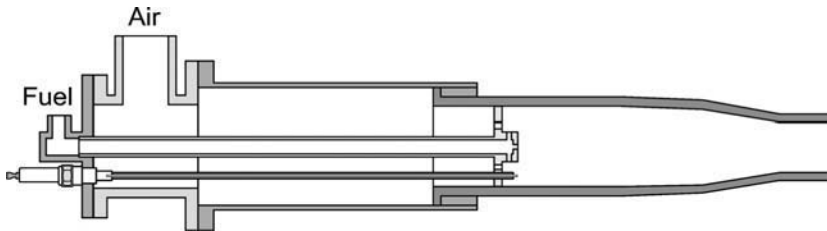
Nozzle mix tube burner with extended self-supporting tile.
